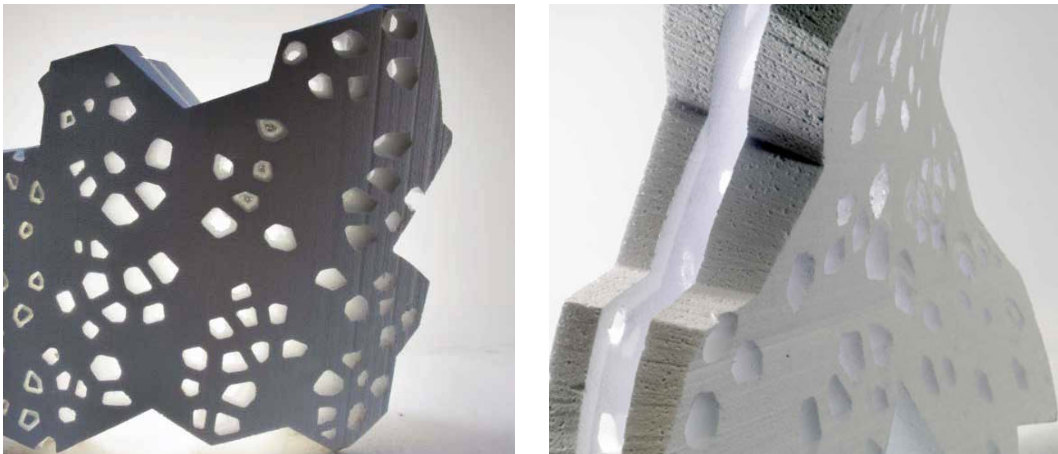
Creating internal cavities using multi-mode hot wire cutting robotic milling; one-piece component produced with seven-axis production setup with multiple end-effectors without crushing the material as all surfaces are developable.
